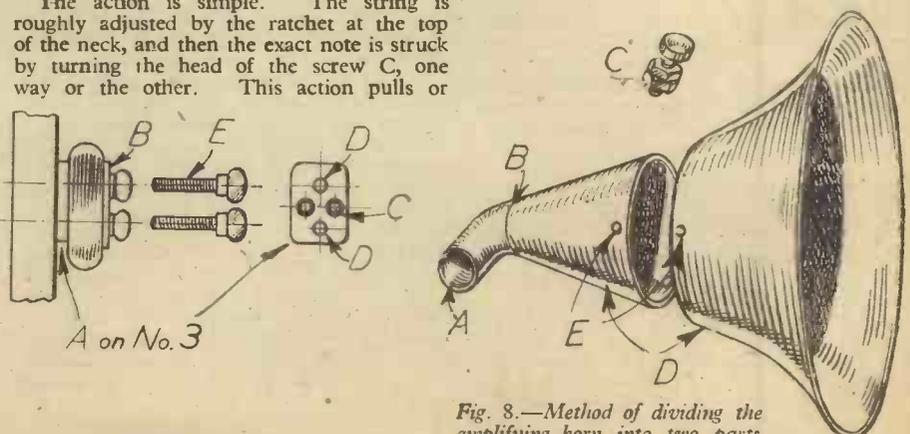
Method of dividing the amplifying horn into two parts, showing how they are clamped together.
